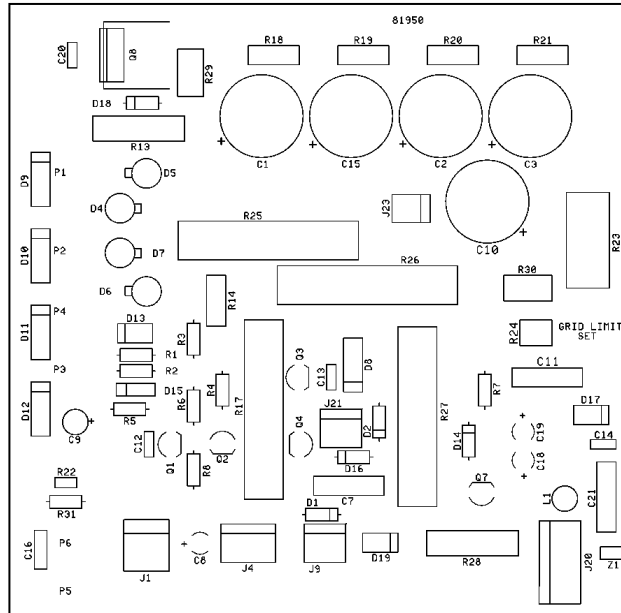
HIGH VOLTAGE RECTIFIER BOARD (ASSEMBLY A2)
